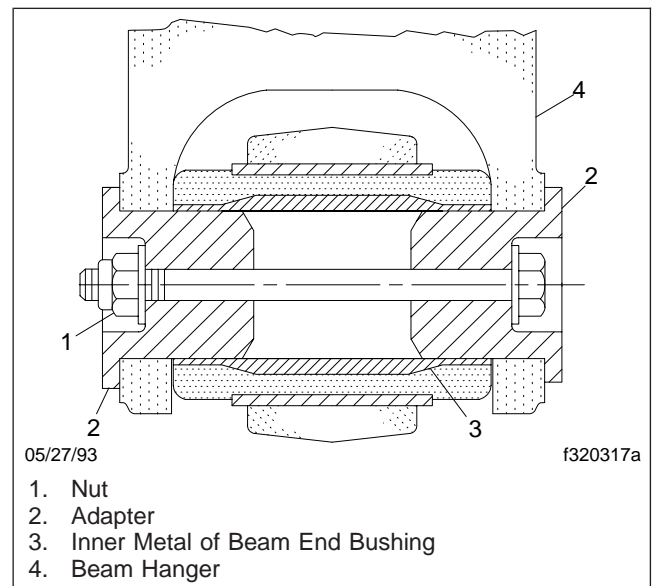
, Two-Piece Adapter-Type Beam End Connection
